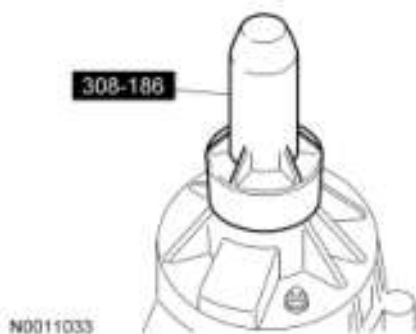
Installing Rear Output Shaft Oil Seal Using Special Tools (308-186)
